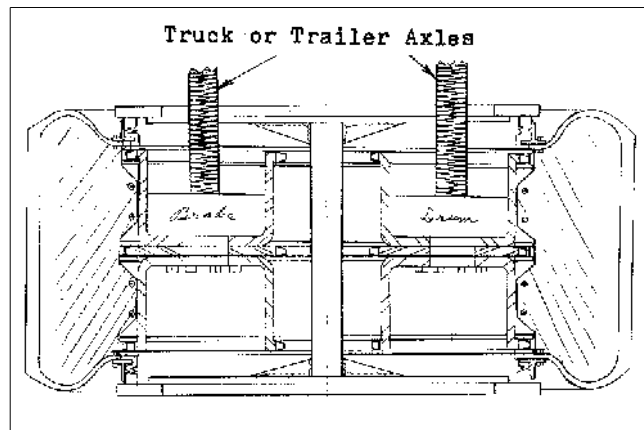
Horizontal section of Tandem Dual Semi Tractor-Trailer wheel set conversion to Segmented Air Track Crawler
